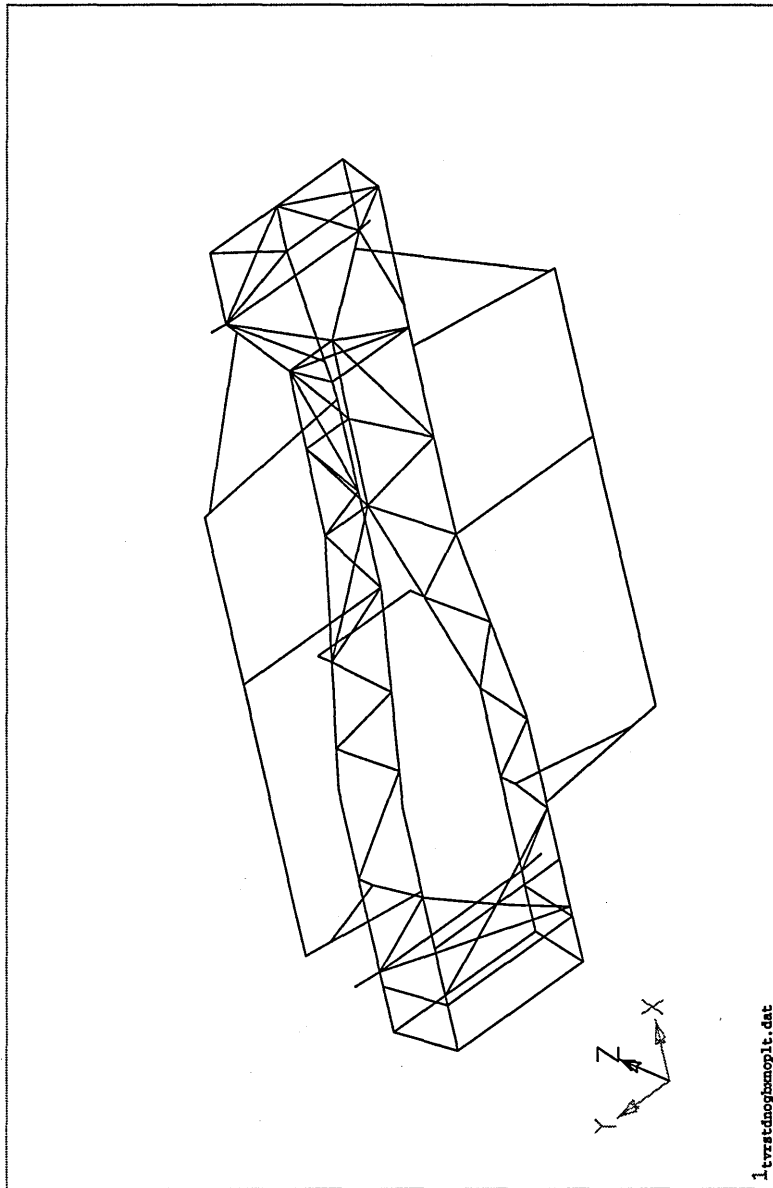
Chimaera Chassis without the gearbox member or plate
